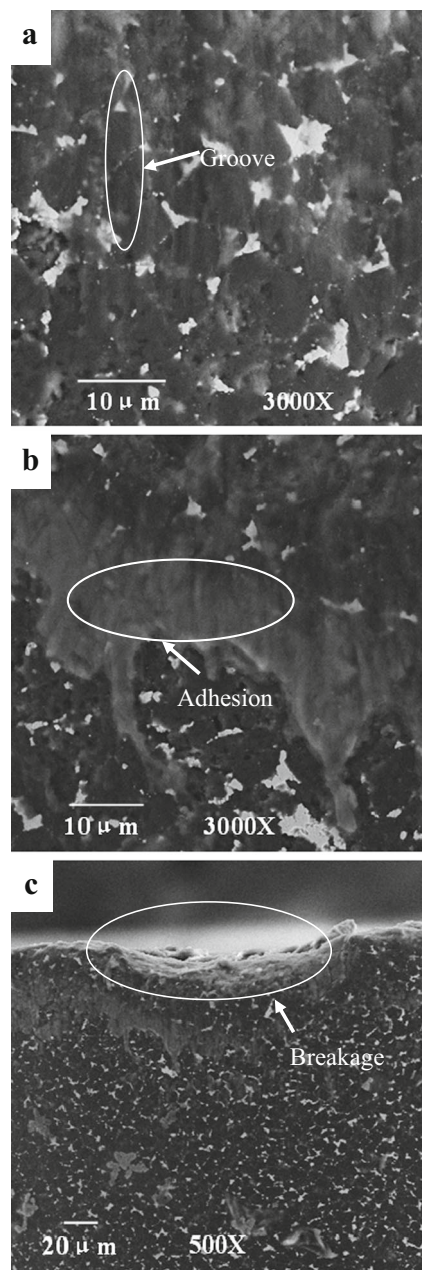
Tool wear morphologies of PCD tool: a groove, b adhesion, c breakage
